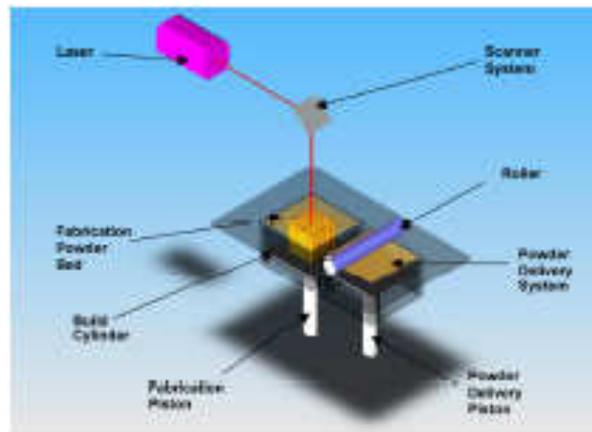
schematic view of the selective laser sintering techniques [22].
